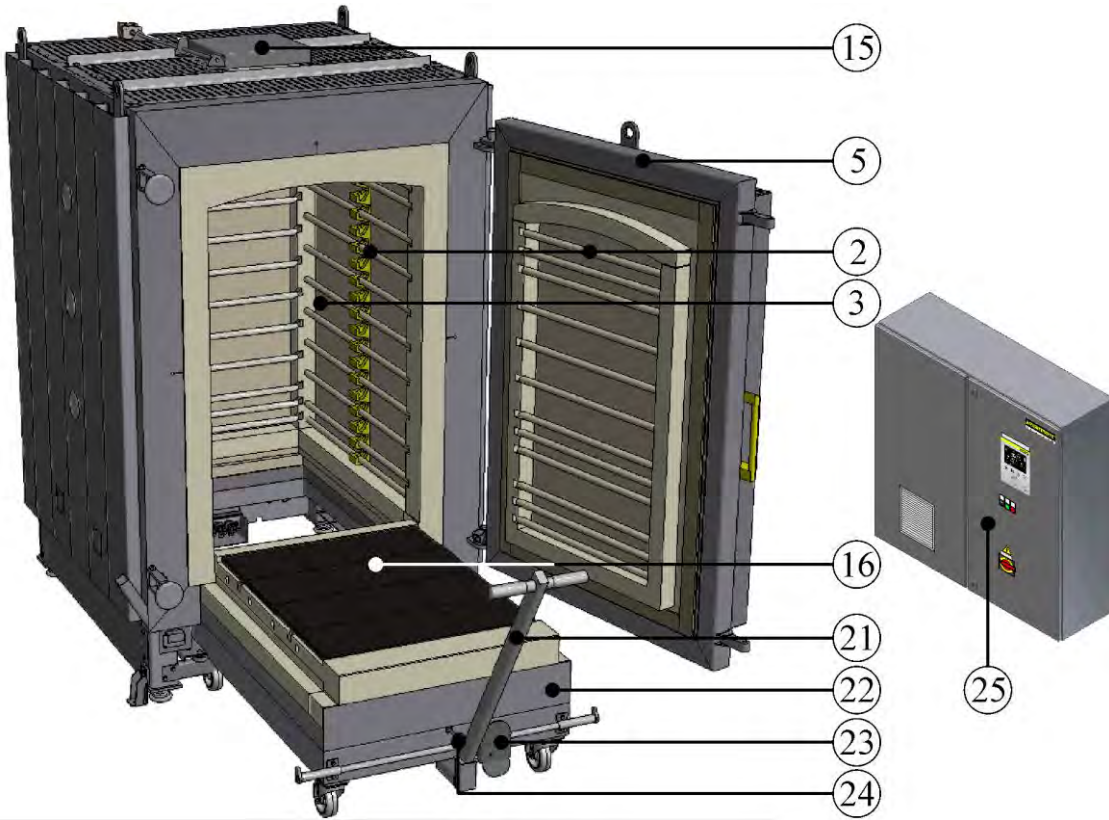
Example: Chamber furnace NW 300 with slide-in drawer
